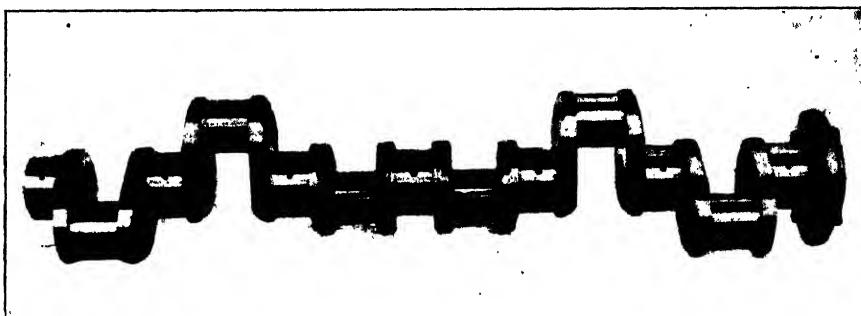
Crankshaft. (Reduction Gear Coupling Flange to right).
